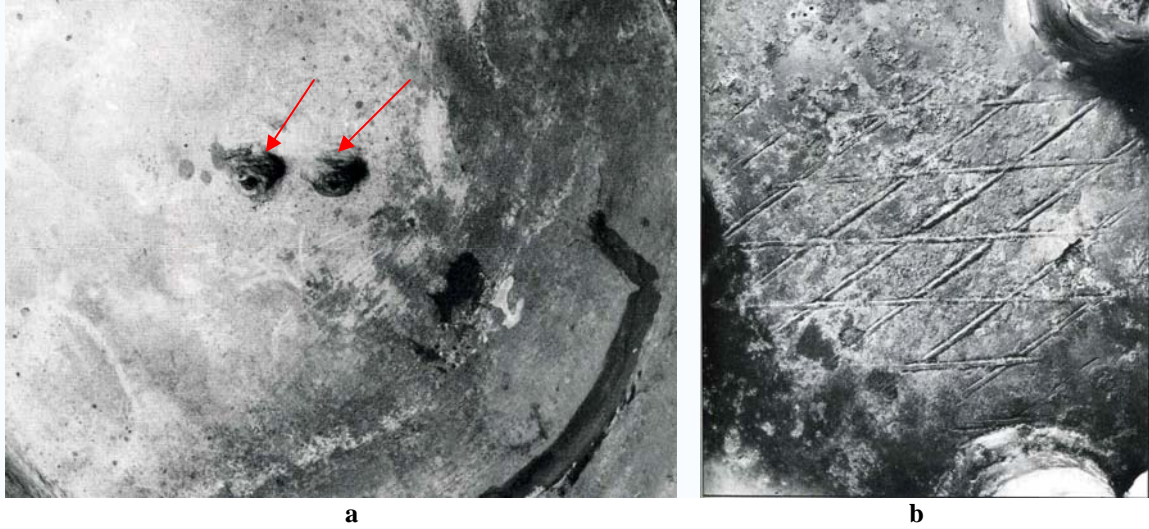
a) Bottom of *zun*, holes (vents) were pierced into the casting to enable flow of entrapped gas; b) underside of bronze *ding* showing criss-cross pattern used to relieve entrapped gas [20].
